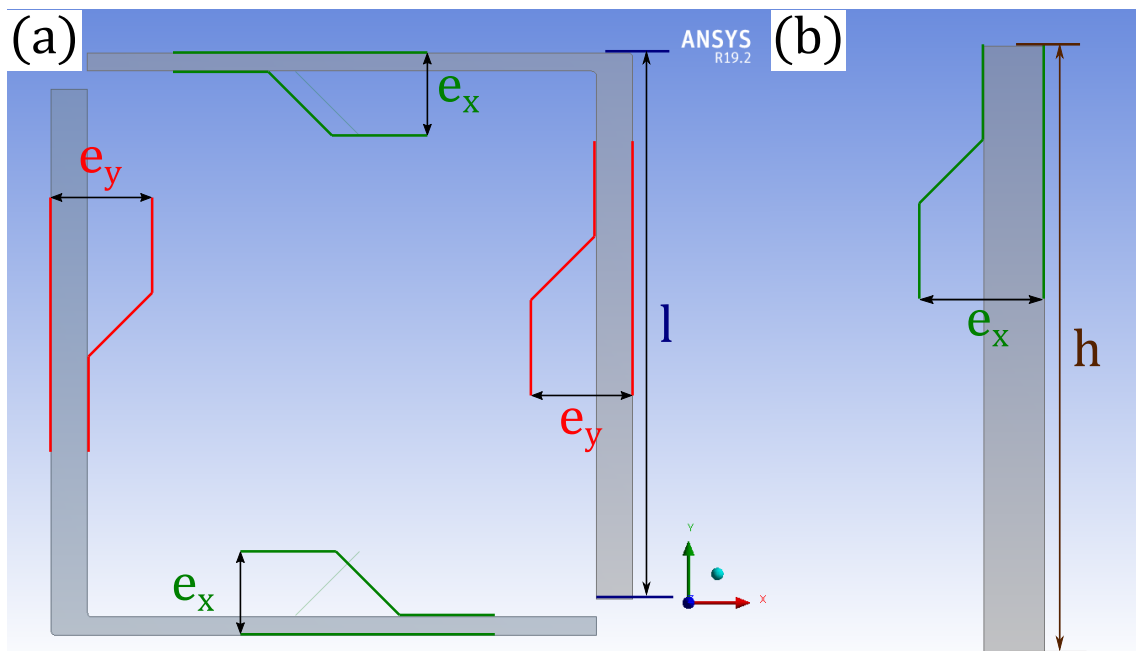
Representation of the geometrical parameters of the spring 1 (a) View from XY plan (b) Cross section of one beam viewed from ZY plan
